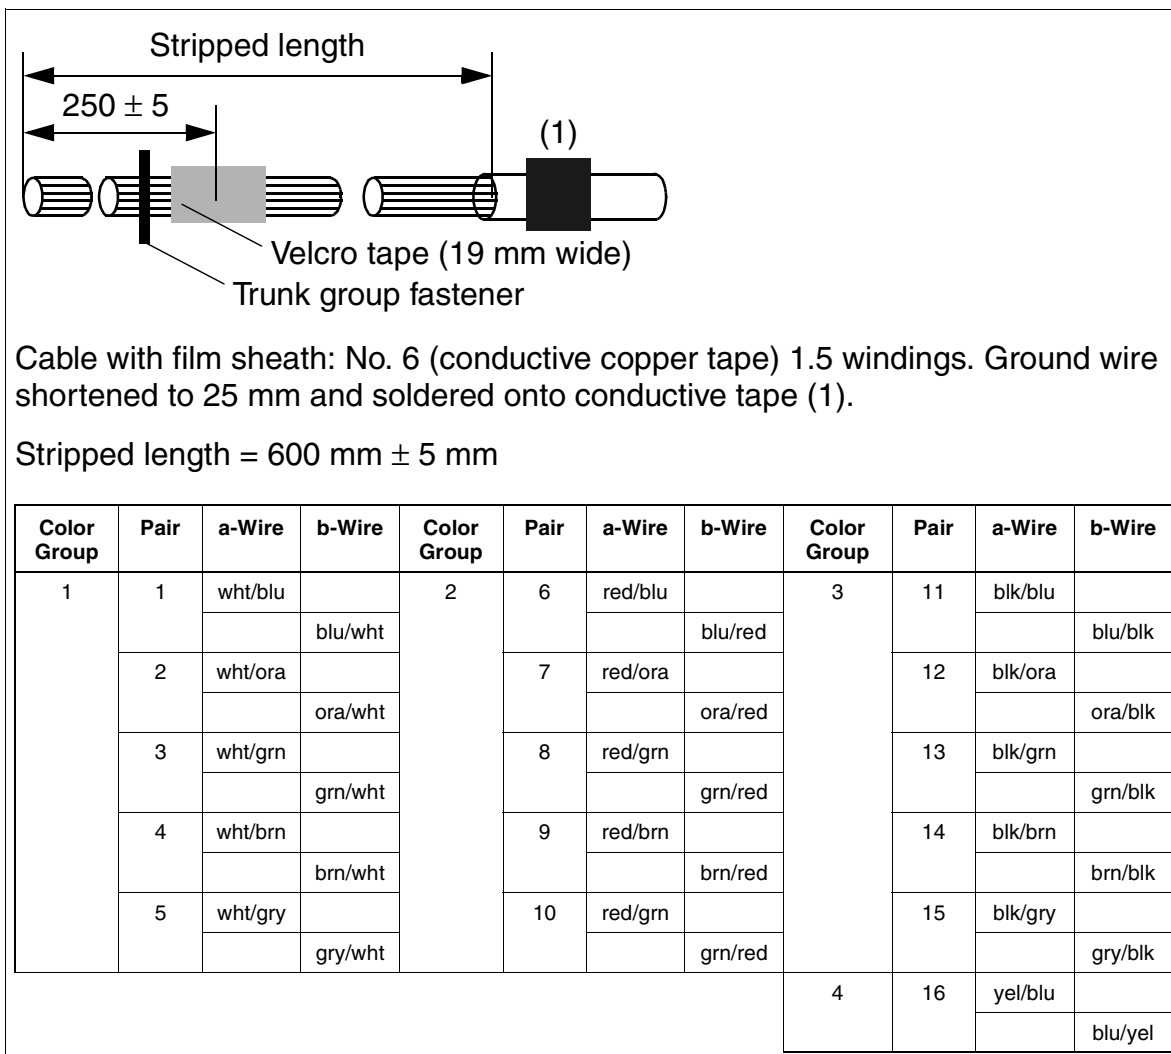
Stripping the Open-End Cable for the S₀ Patch Panel
